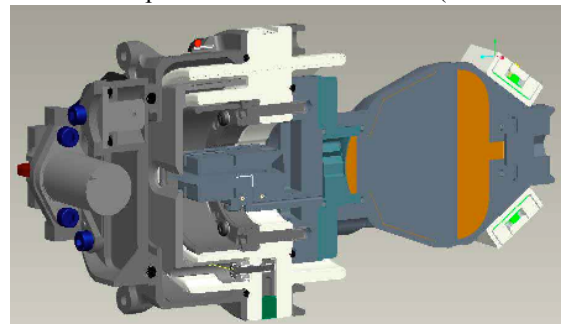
Slit FEED Thruster Assembly. LOM, thruster unit incl. emitter, tank and heaters.
